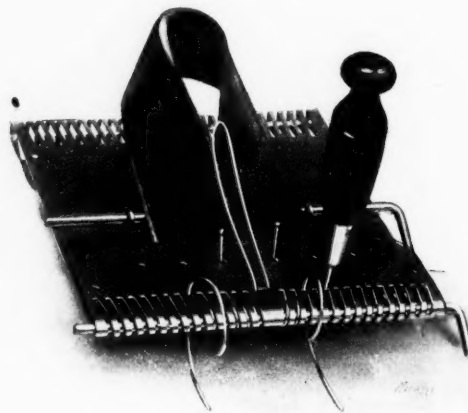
Tool for Truing, which permits Adjustment of Carbon to present Fresh Cutting Edges
